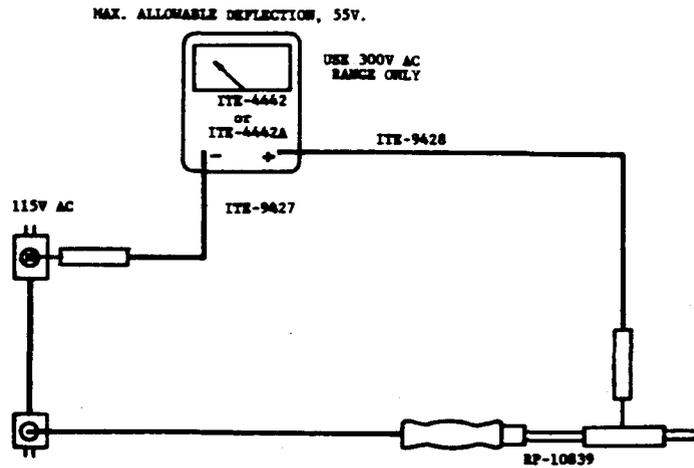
CHECKING SOLDERING COPPER FOR LEAKS OR GROUNDS (PAR. 5.1.3)
